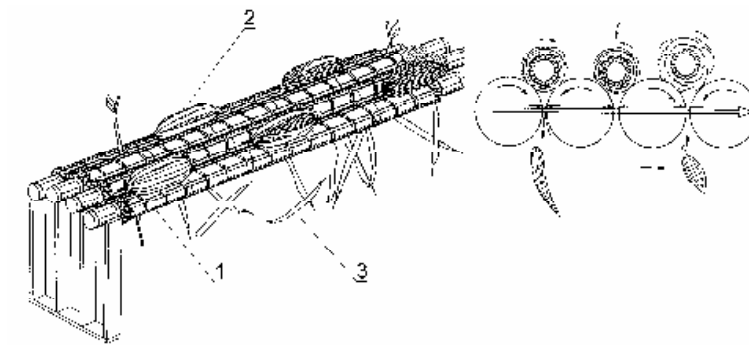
Corncob cover leaf removing assembly: 1– husking rollers, 2 – corncobs, 3 – cover leaves [113]
